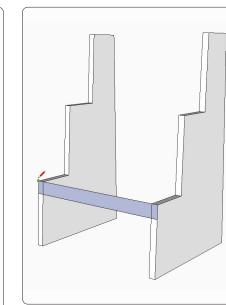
With the side component copied and placed, draw a rectangle over an angled riser to rough-in the front stretcher.
